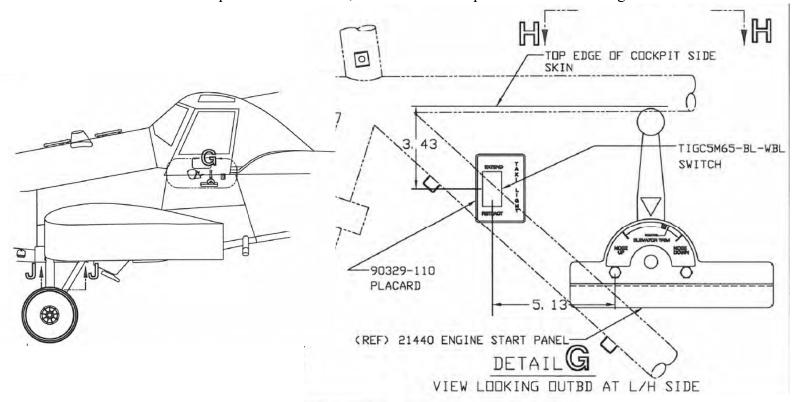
Location of 90329-110 Placard and 90329-108 Placard
